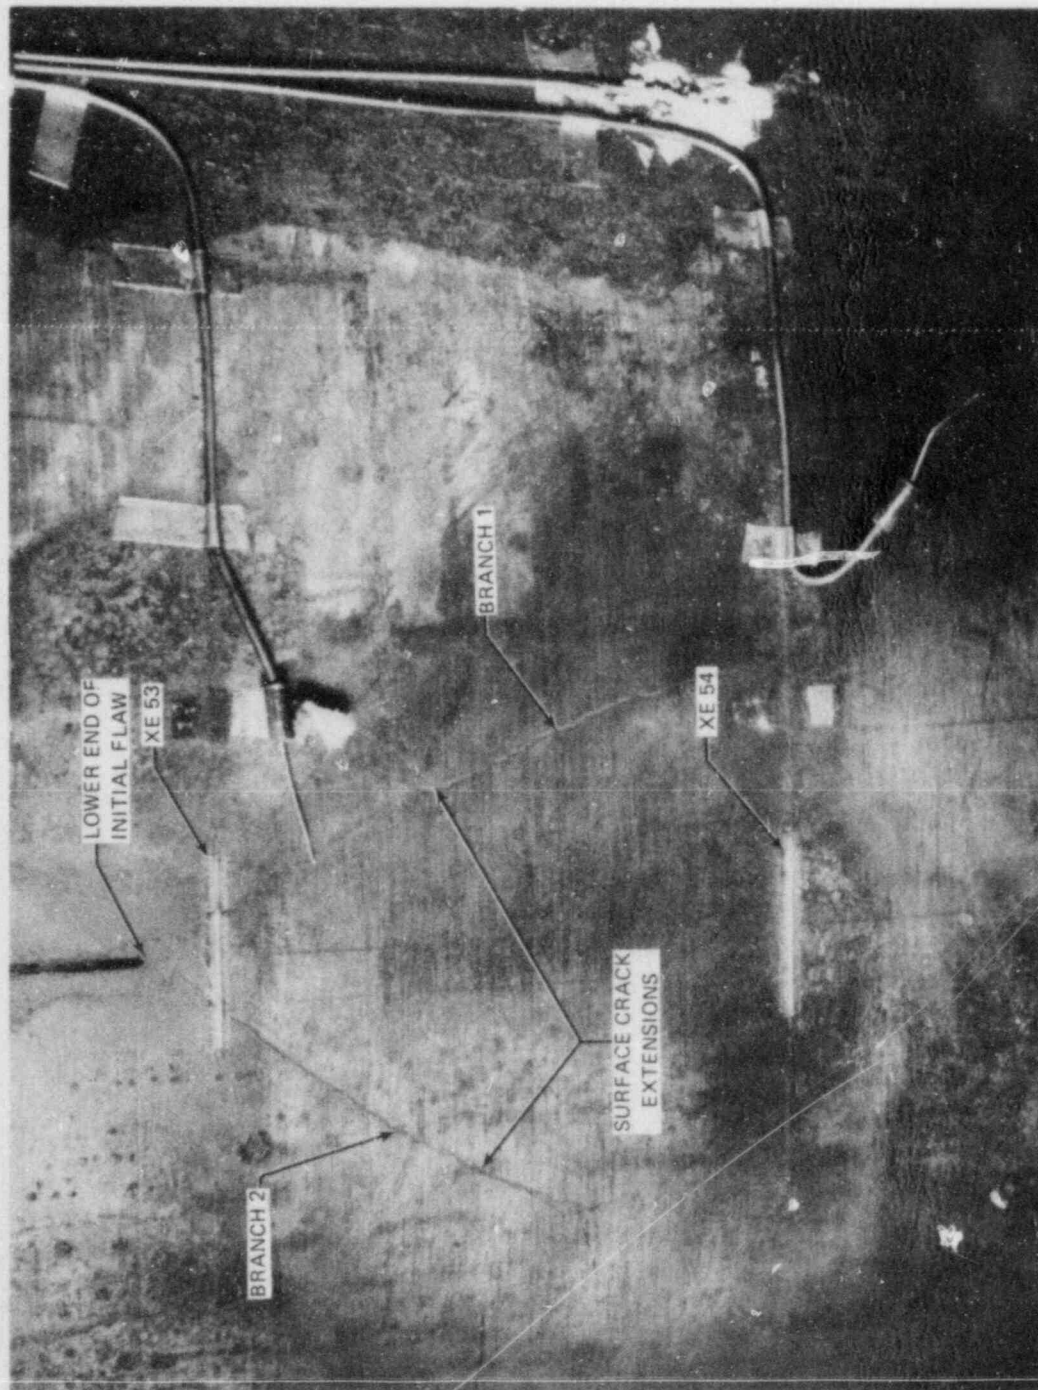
Posttest photograph of outside surface of PTSE-1 vessel at lower end of flaw.
